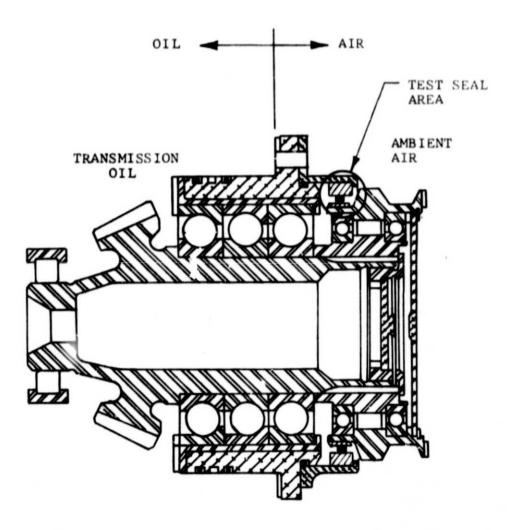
Helicopter Transmission Input Shaft Assembly (from ref. 3)
